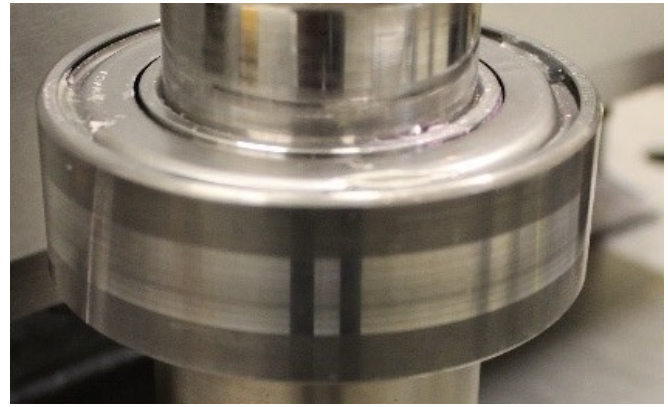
Test Bearings Mounted on Shaft with Inner Race Spacer
